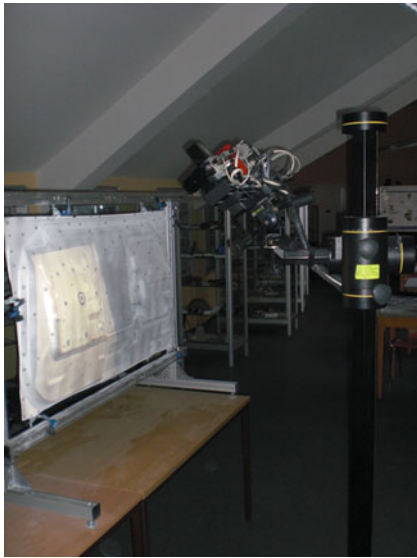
Vertical clamping frame with die formed part and 3D-Scanner ATOS
